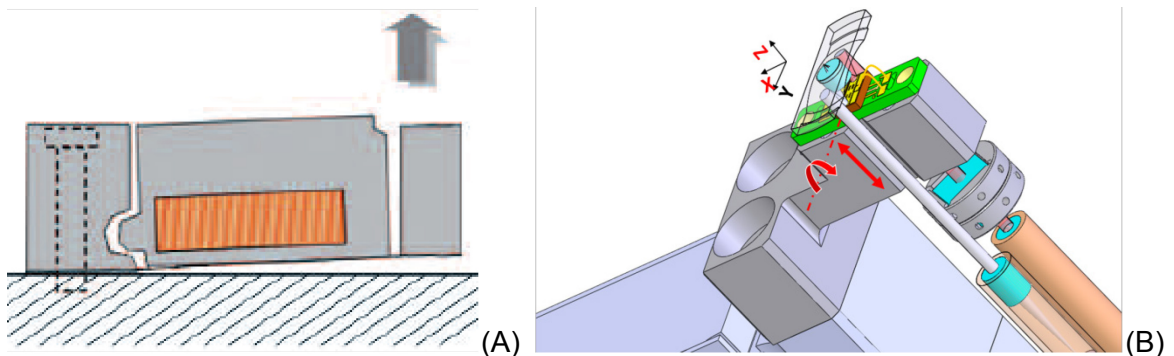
Bulk PZT Z-axis actuator in OD10mm handheld package. (A) Working principle of bulk PZT driver with mechanical amplitude amplification mechanism; (B) Integration with 1D Au-coated MEMS scanner in OD10mm package for XZ-plane scanning.
